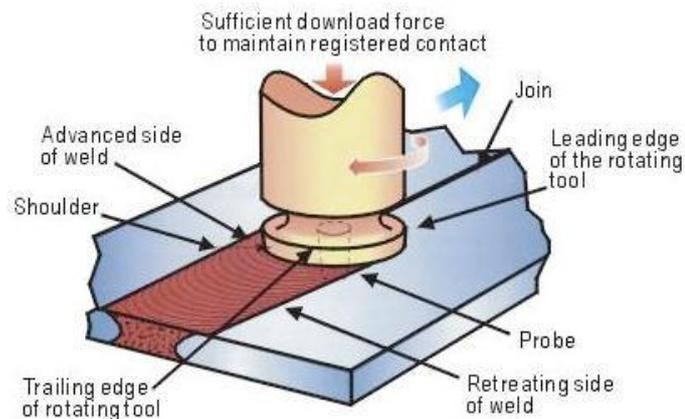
FSW Depicting a Plunged and Rotating Tool Traversing the Work Piece [9]
